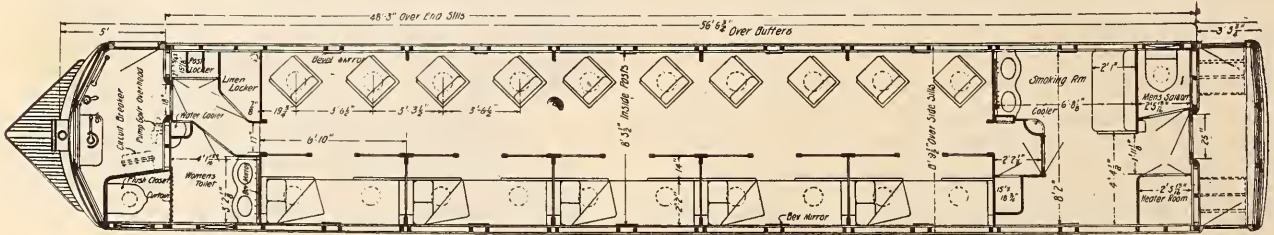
FLOOR PLAN, CONVERTIBLE SLEEPING AND PARLOR CAR.
